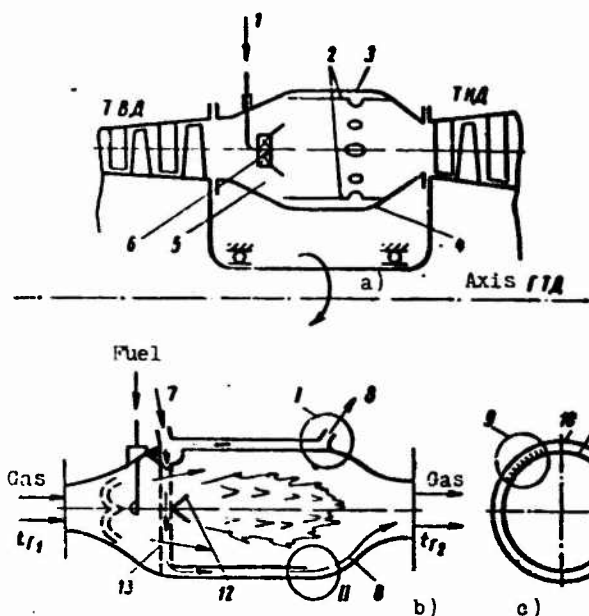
Diagram of gas reheat combustion chambers: 1 - fuel; 2 - exterior interior shields; 3 - exterior housing; 4 - interior housing; 5 - gas reheat combustion chamber; 6 - injector; 7 - cooling air feed; 8 - cooling air tap; 9 - cooling fins; 10 - housing; 11 - shield; 12 - flame holder; 13 - branch connection for supplying cooling air to the interior shield.
